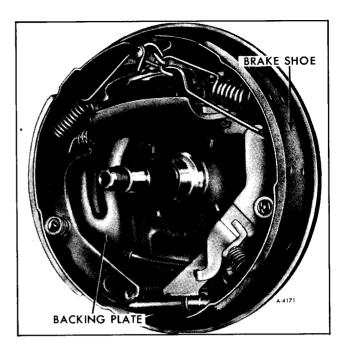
Removing Brake Backing Plate and Brake Shoe Assembly
